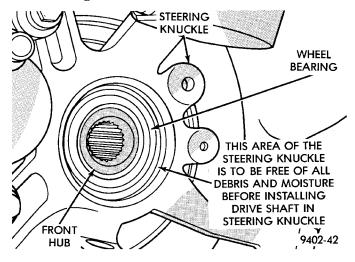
Steering Knuckle to C/V Joint Sealing Area
